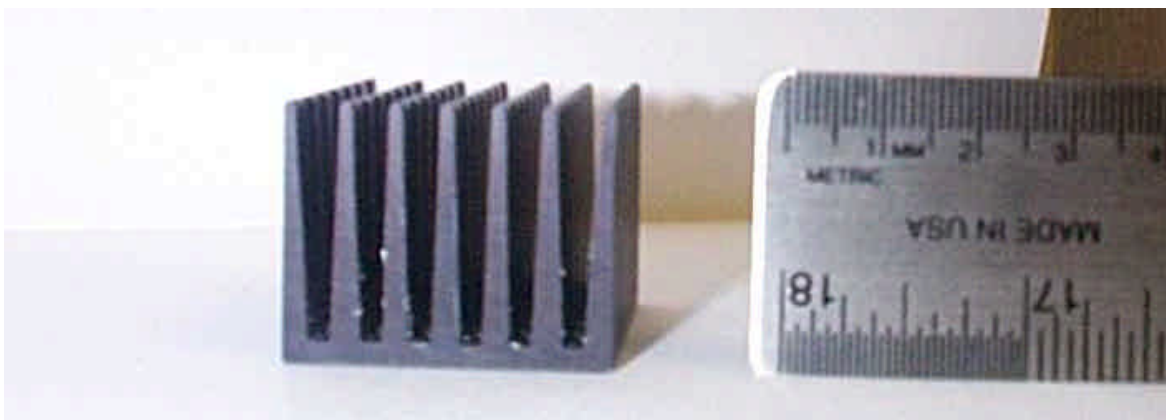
1" Tall 35mmx35mmx28mm crosscut extrusion heat sink, #2.
